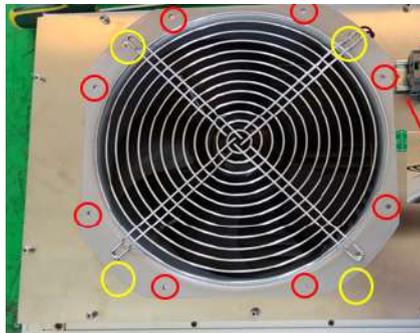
50 Heat dissipation fan fixing holes and fan filter fixing holes
